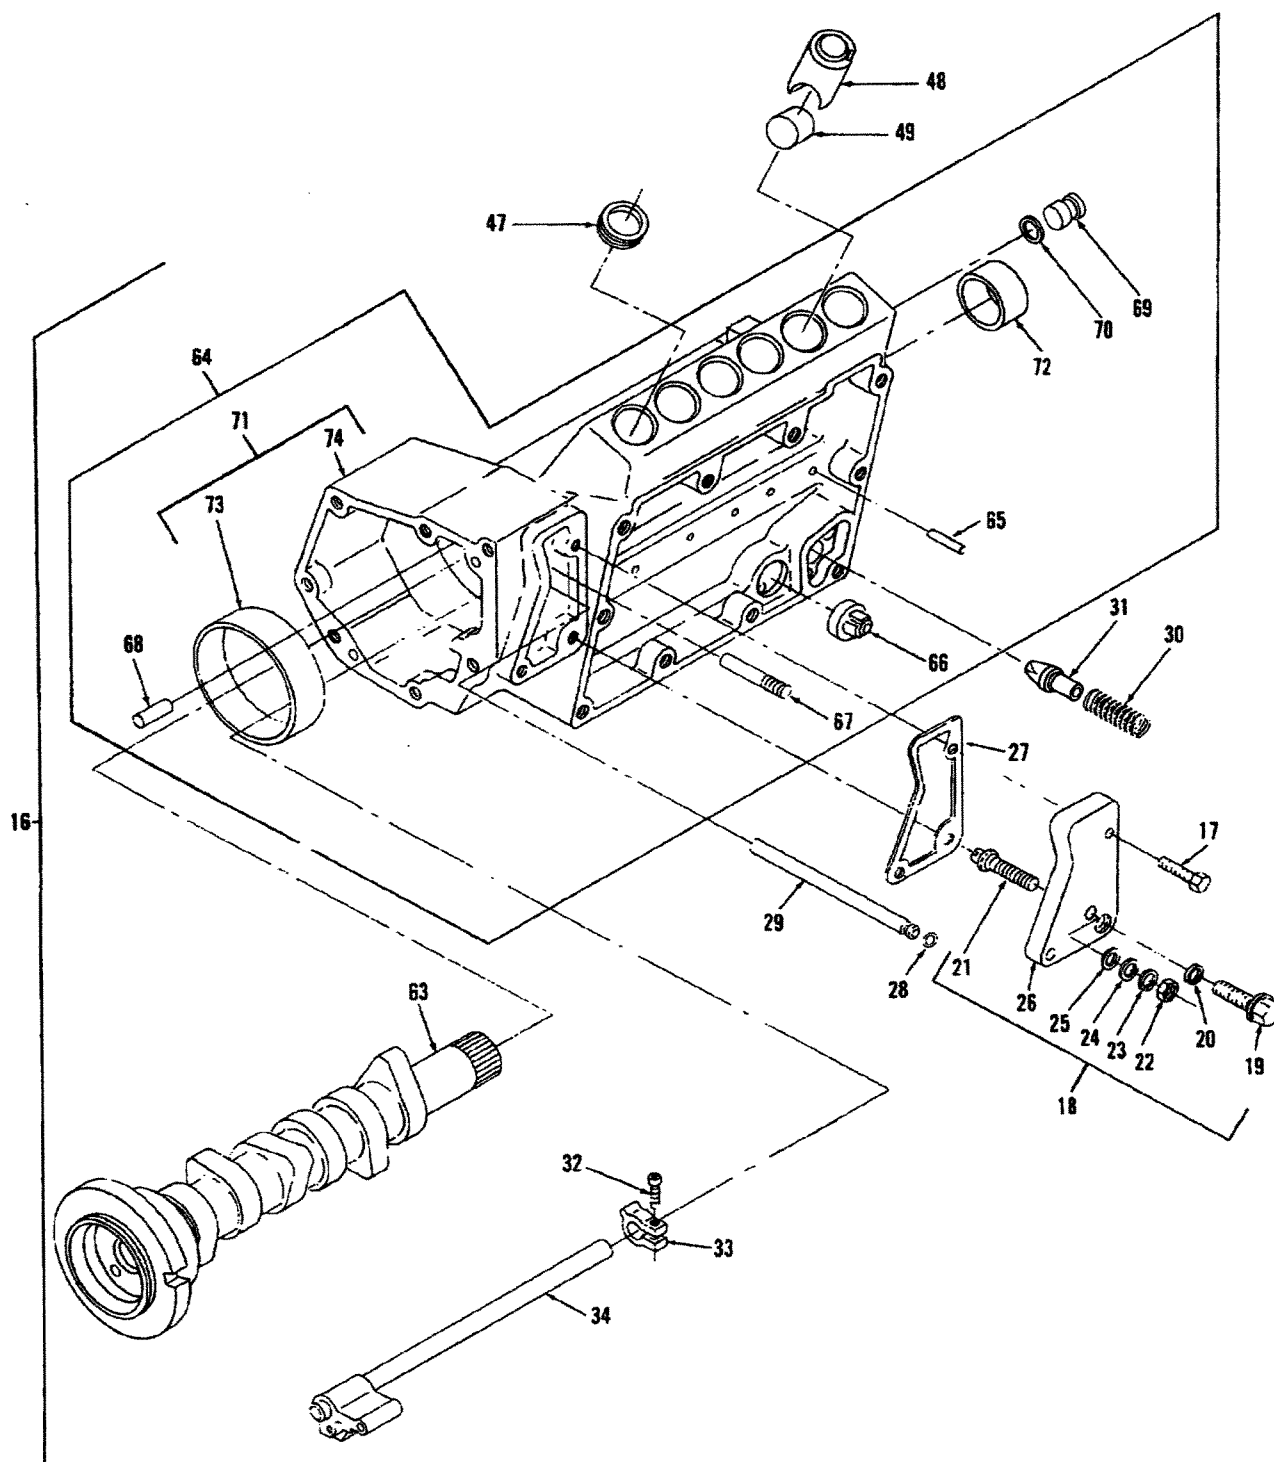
Fuel Injection Pump (Sheet 3 of 4)
